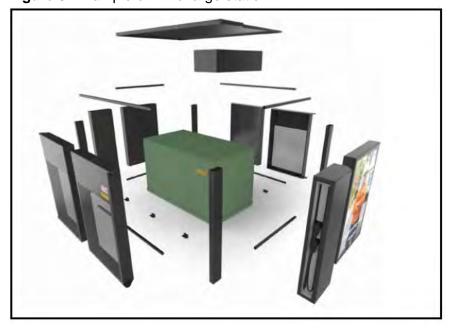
Deconstructed diagram of EV charge station and signage over substation
